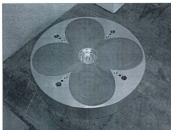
The resin filled first side of the propeller has been milled flat for mounting.
